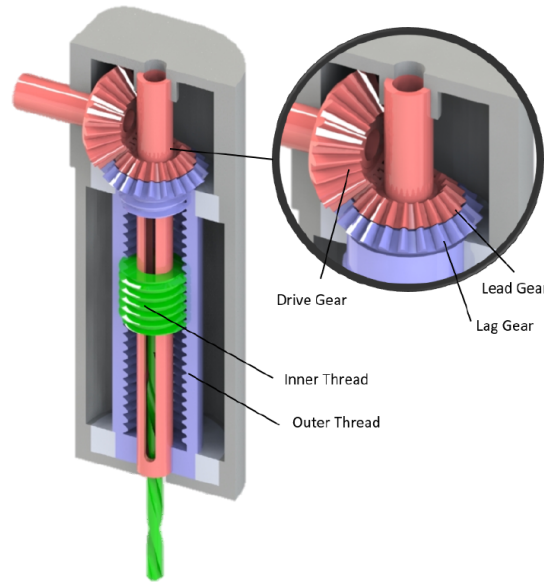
Section view of the lead screw- and differential thread mechanisms[1]. The incoming rotation (Drive gear in red on the left) is transferred to a lead gear and a lag gear, which have a different number of teeth. This results in a rotational speed difference between the inner thread on the nut (green) and outer thread (blue). This makes the green part, with the drill bit attached, translate along the drilling axis.
